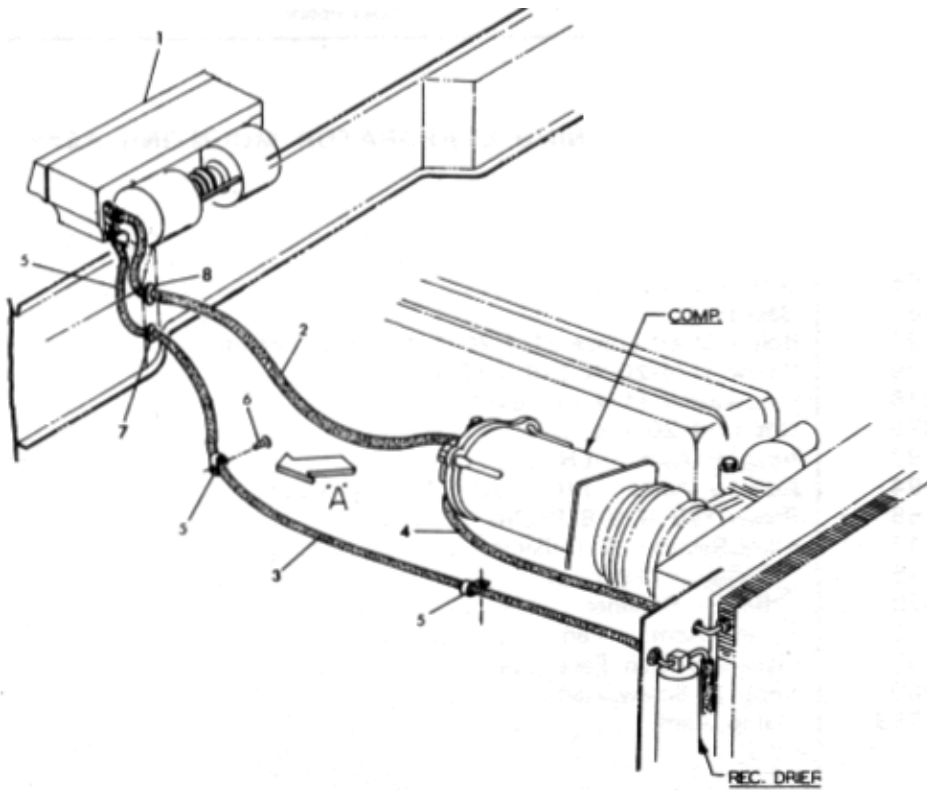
Air Conditioning Evaporator Mounting Assembly .Rear
